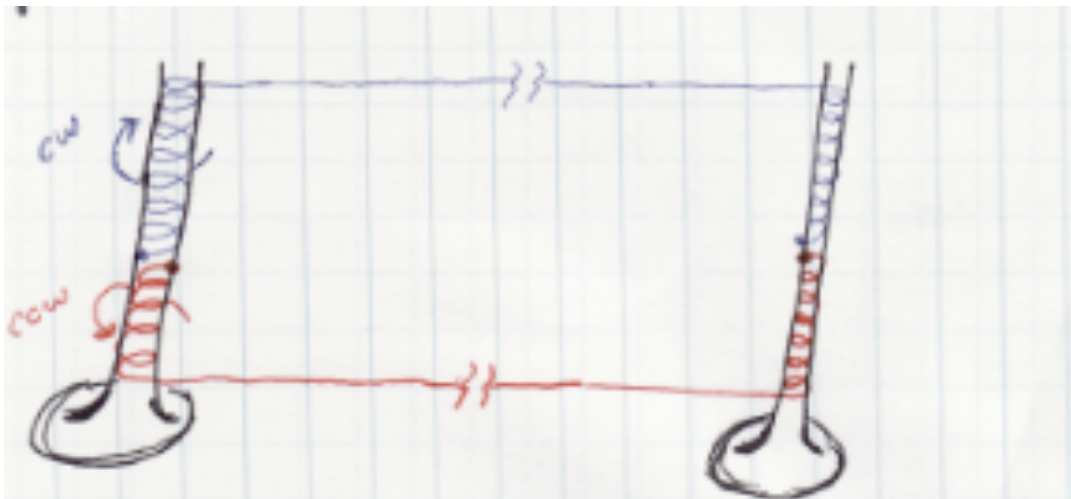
Hand-controlled, counter wound shaft actuated cable system. This system would consist of two vertical shafts that would be wound by two different wires opposite directions. The rotation of one shaft would actuate a pull-pull mechanism.
